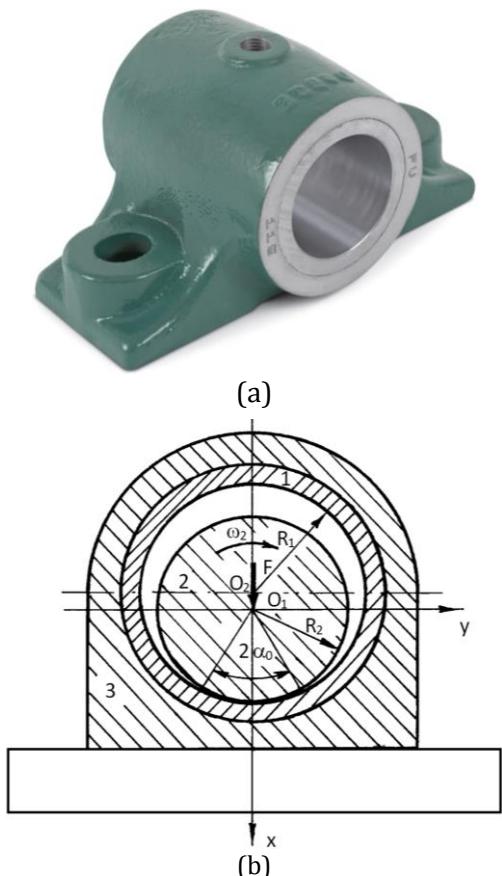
Metal-polymer sliding bearing: (a) - general view; (b) - scheme (1 - composite bushing, 2 - shaft, 3 - housing).
